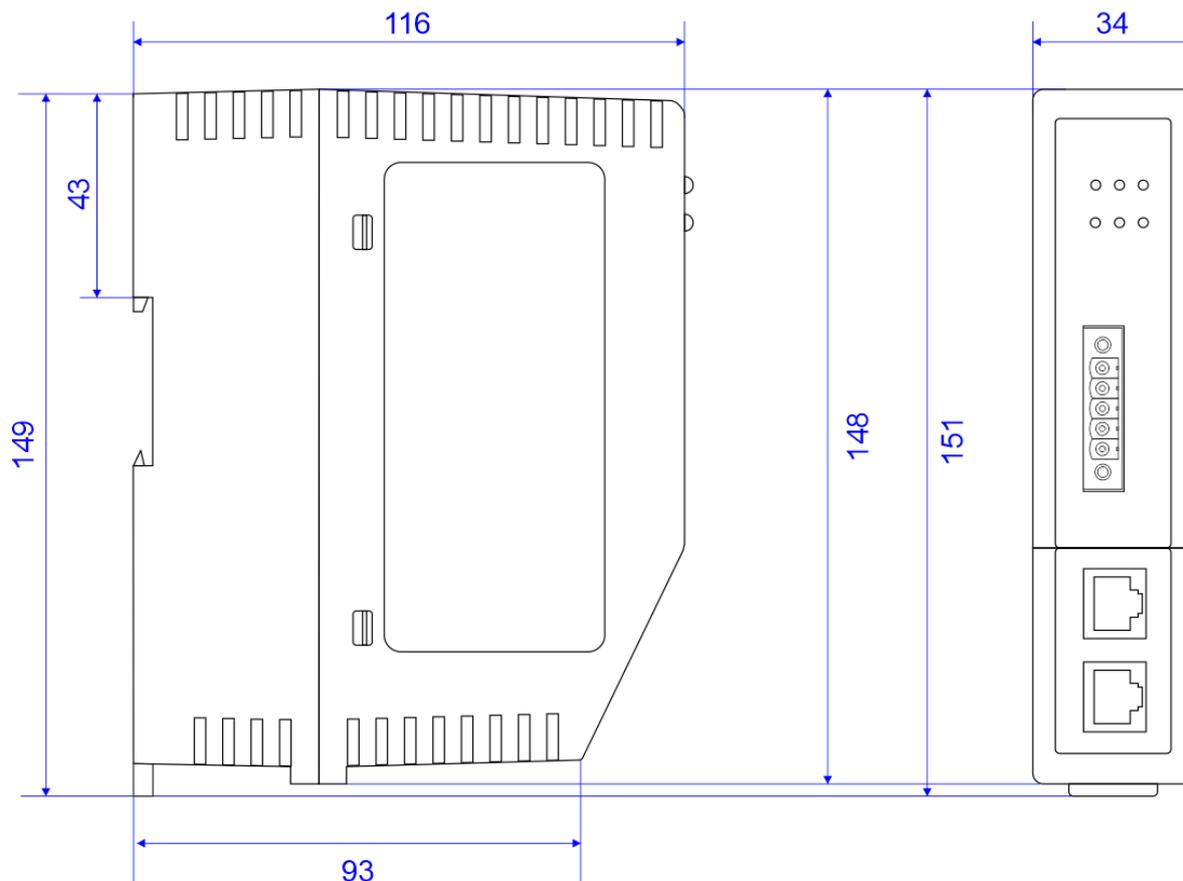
DeviceNet Router/B enclosure dimensions
